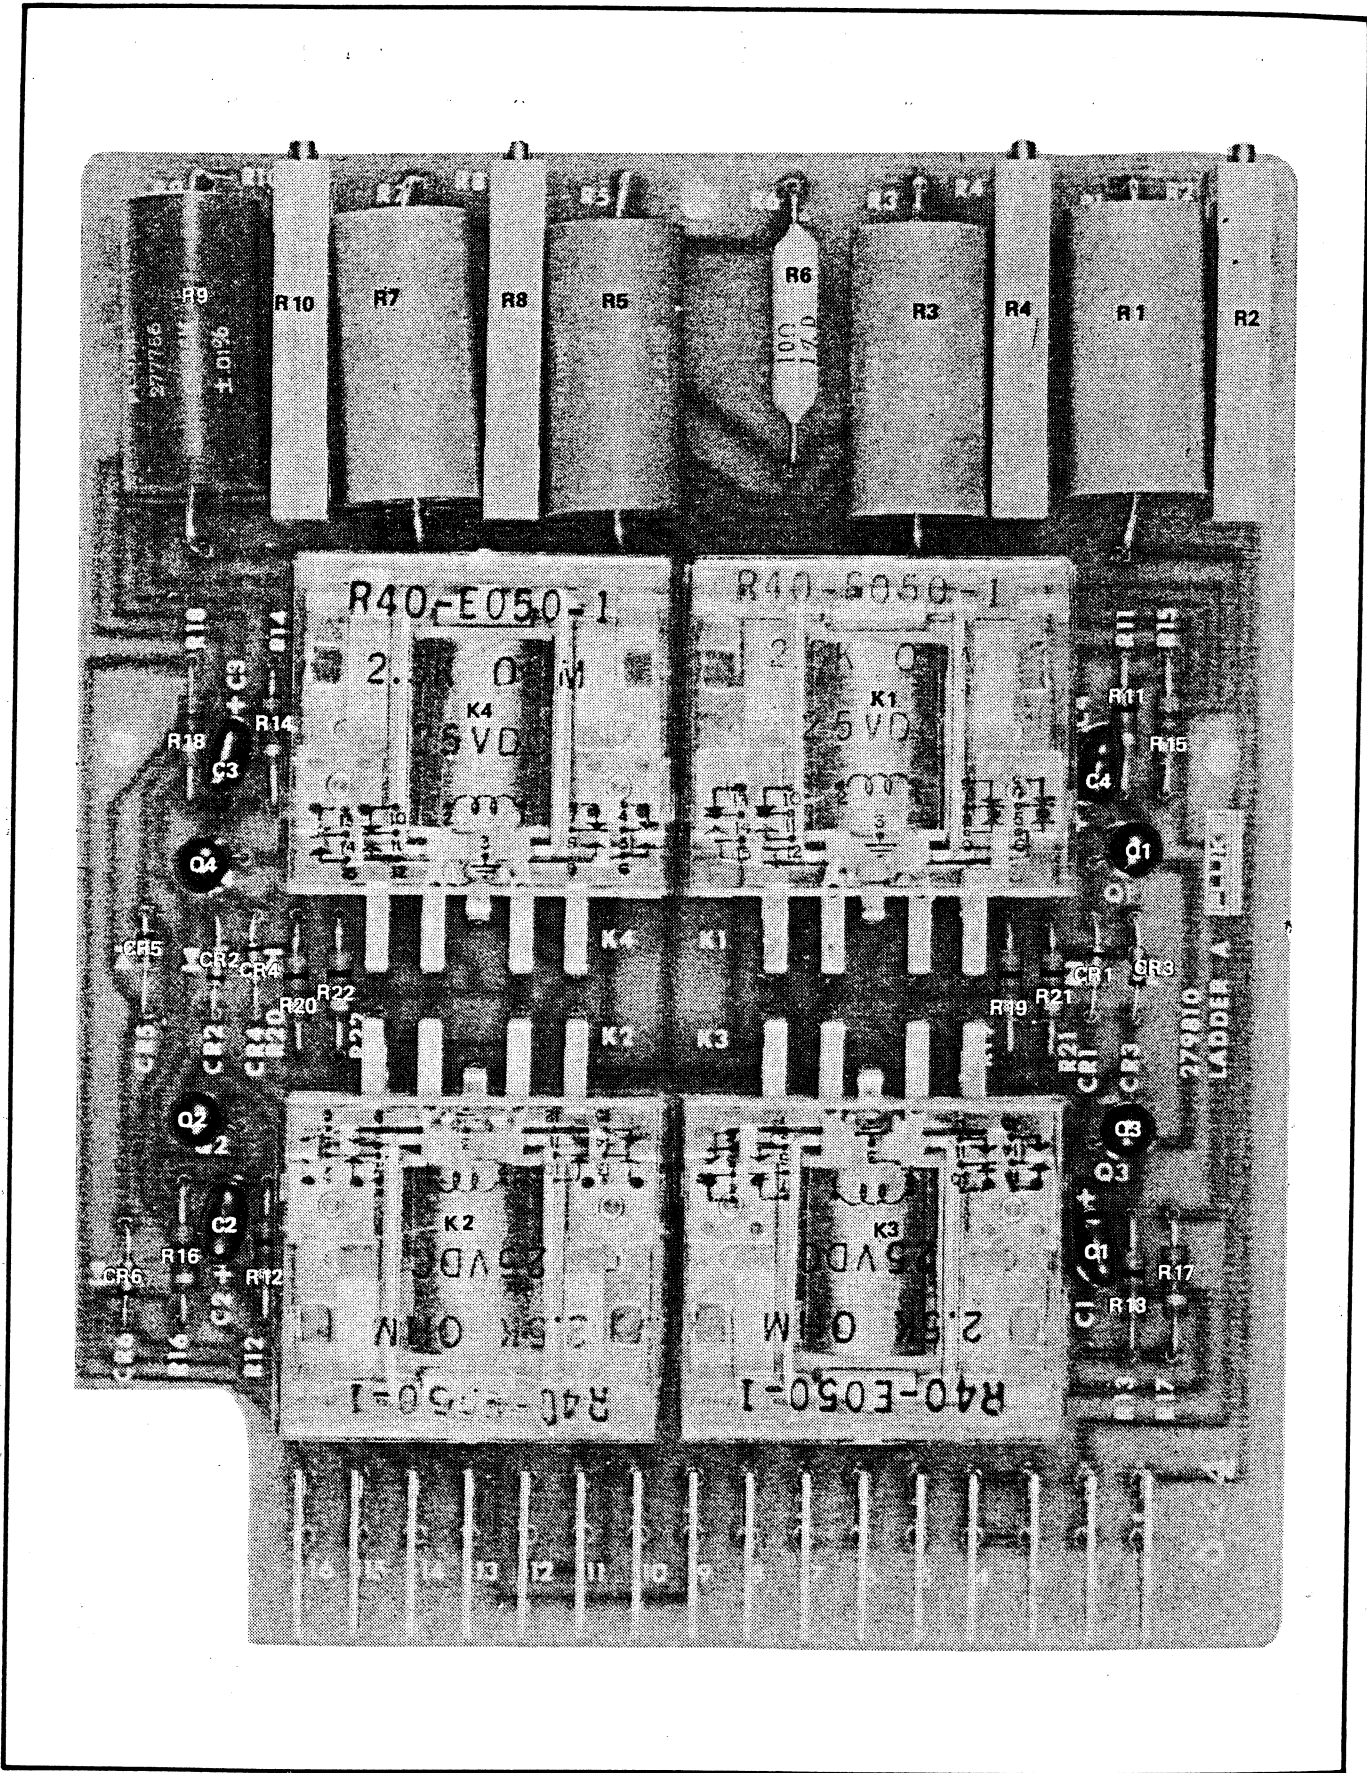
LADDER DRIVER NO. 1 ASSEMBLY
